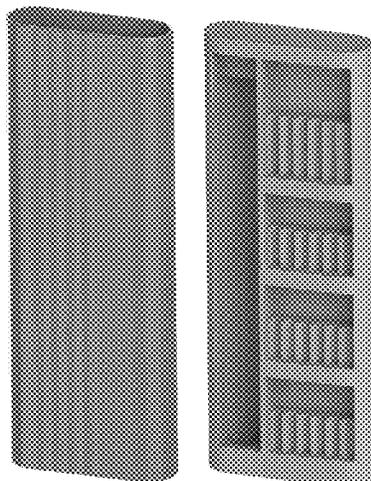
is a left side elevational view of the toolbox for screwdriver tips shown in an alternate configuration with the left structure showing the outer part, and the right structure showing the inner part, shown separately to show aspects of the design that are not visible when combined;
